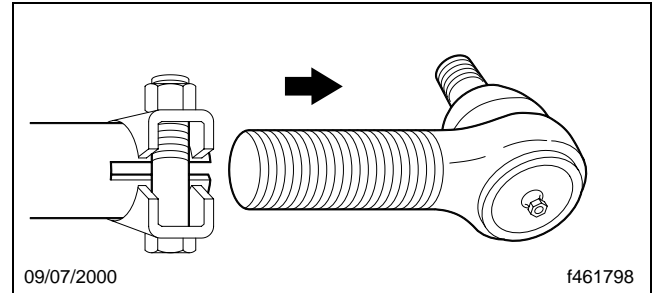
, Remove the Threaded Tie Rod End from the Cross Tube
